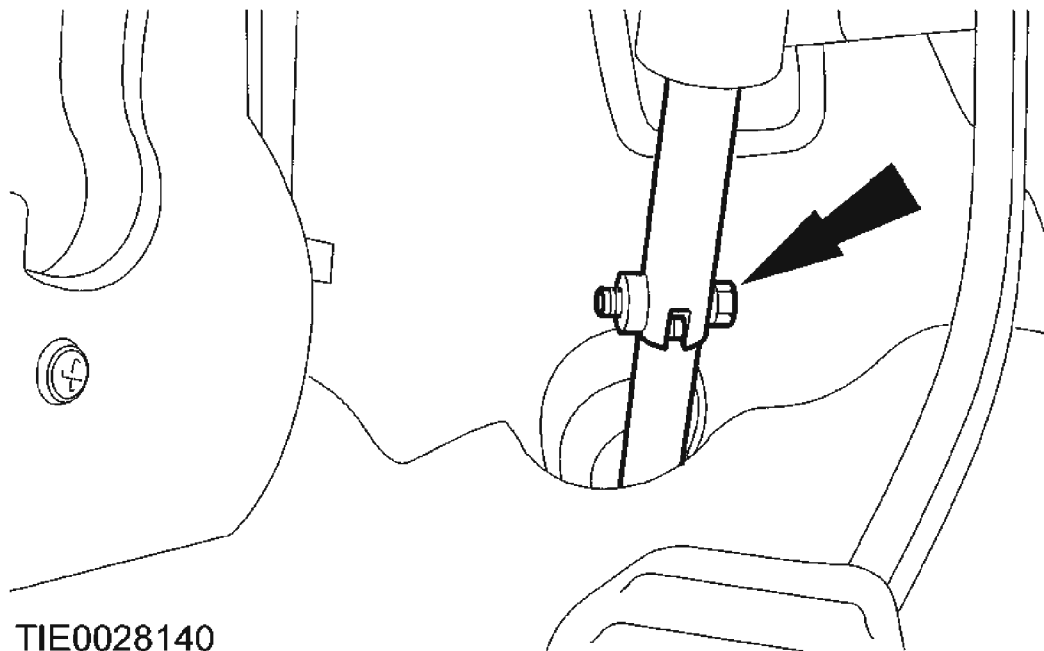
Disconnecting Steering Column Shaft From Steering Column Coupling Shaft
